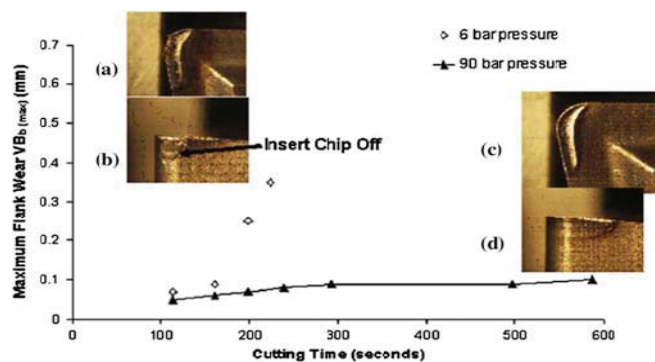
a. Tool wear along with a crater view and b. flank view of the insert obtained after tool chip-off with the application of standard pressure coolant. c. crater view and d. flank view of the insert [45]
